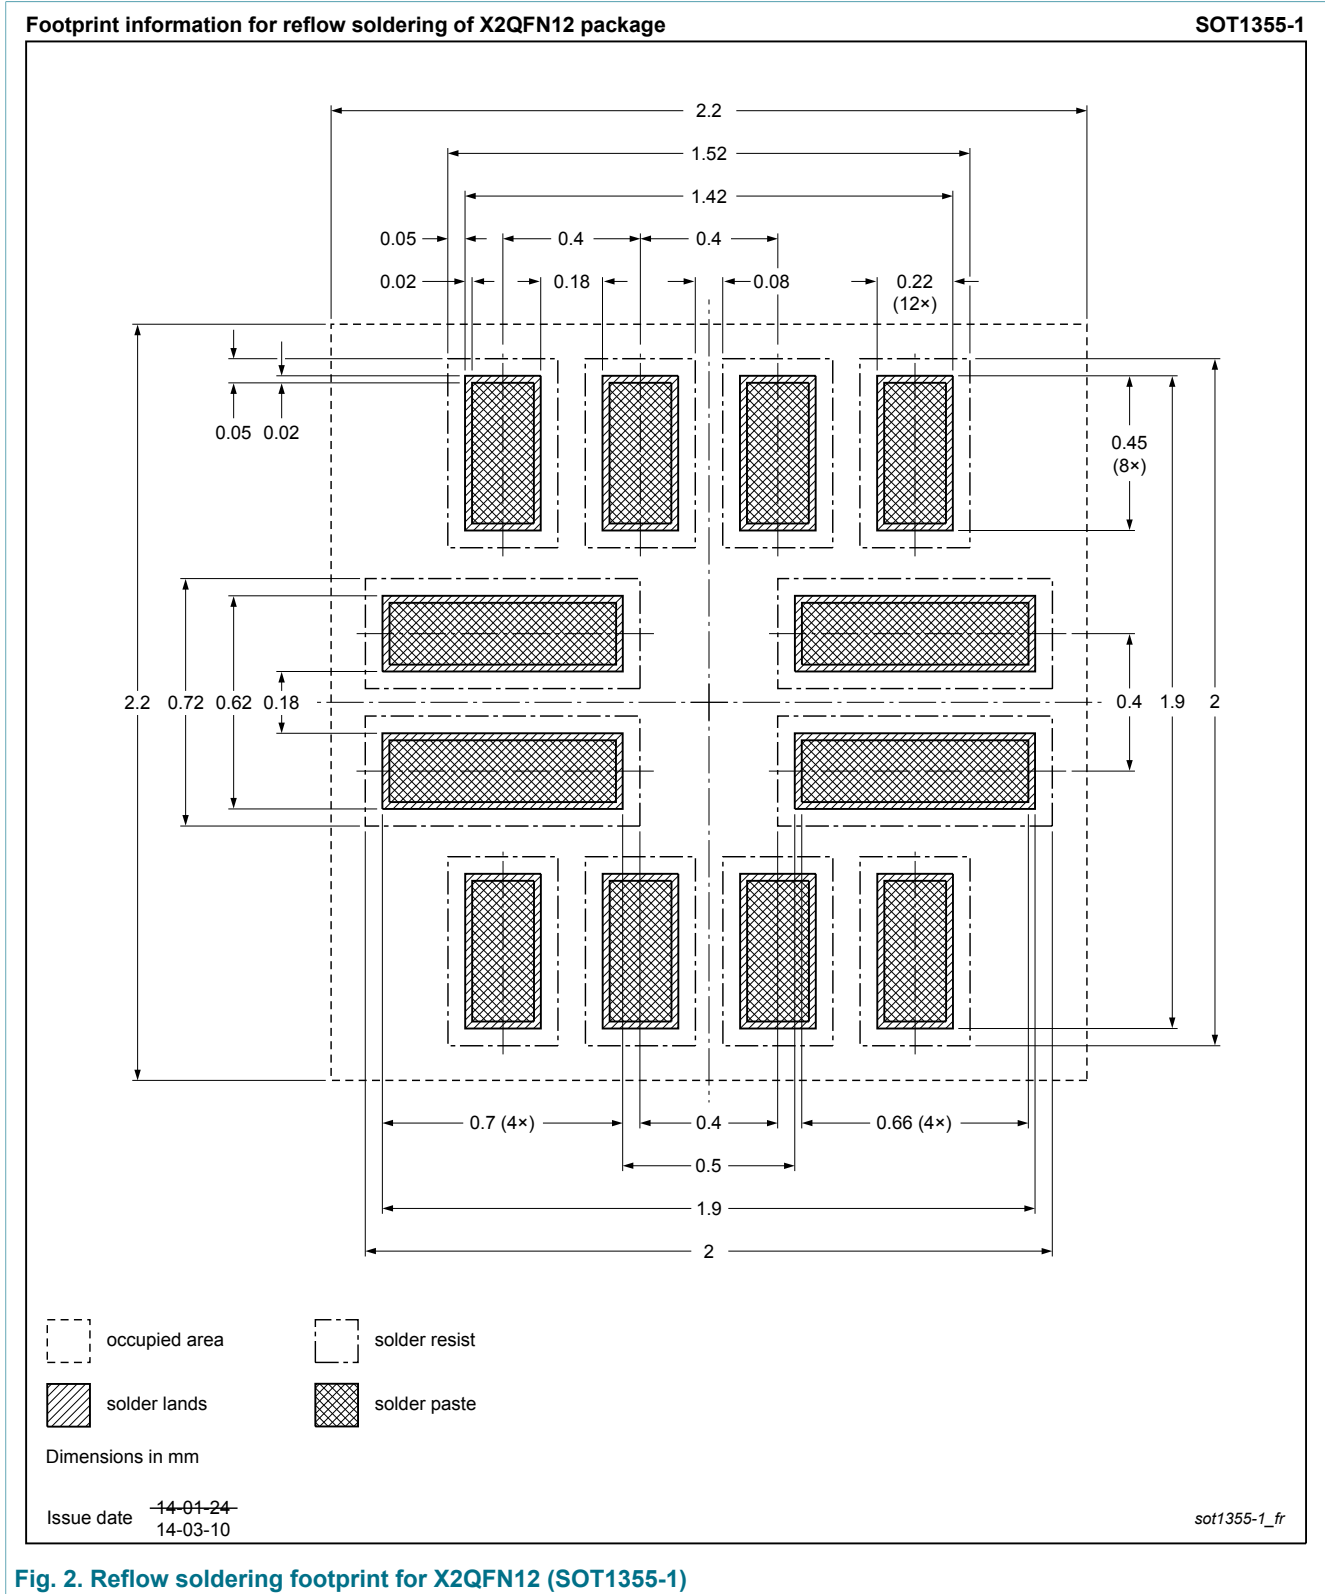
Reflow soldering footprint for X2QFN12 (SOT1355-1)
